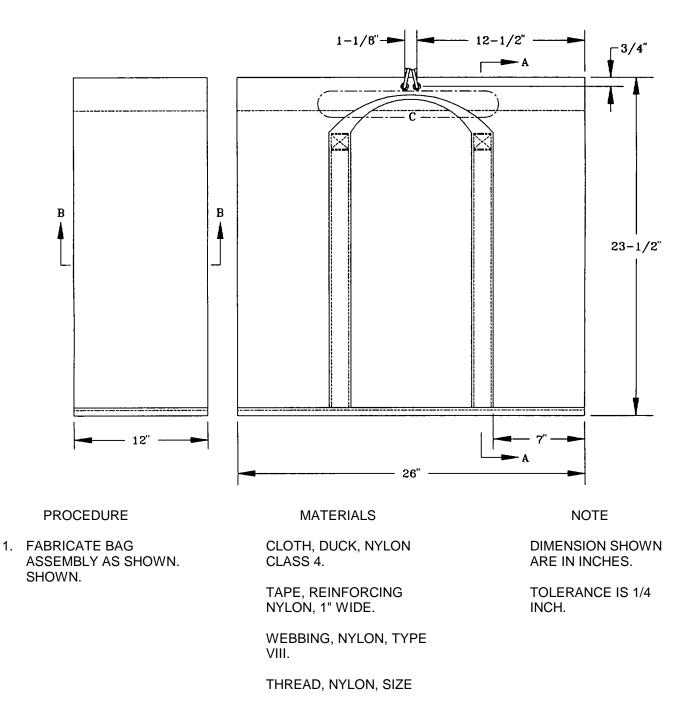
(Container Front Mounted) Kit, Bag Assembly (Sheet 1 of 2)
